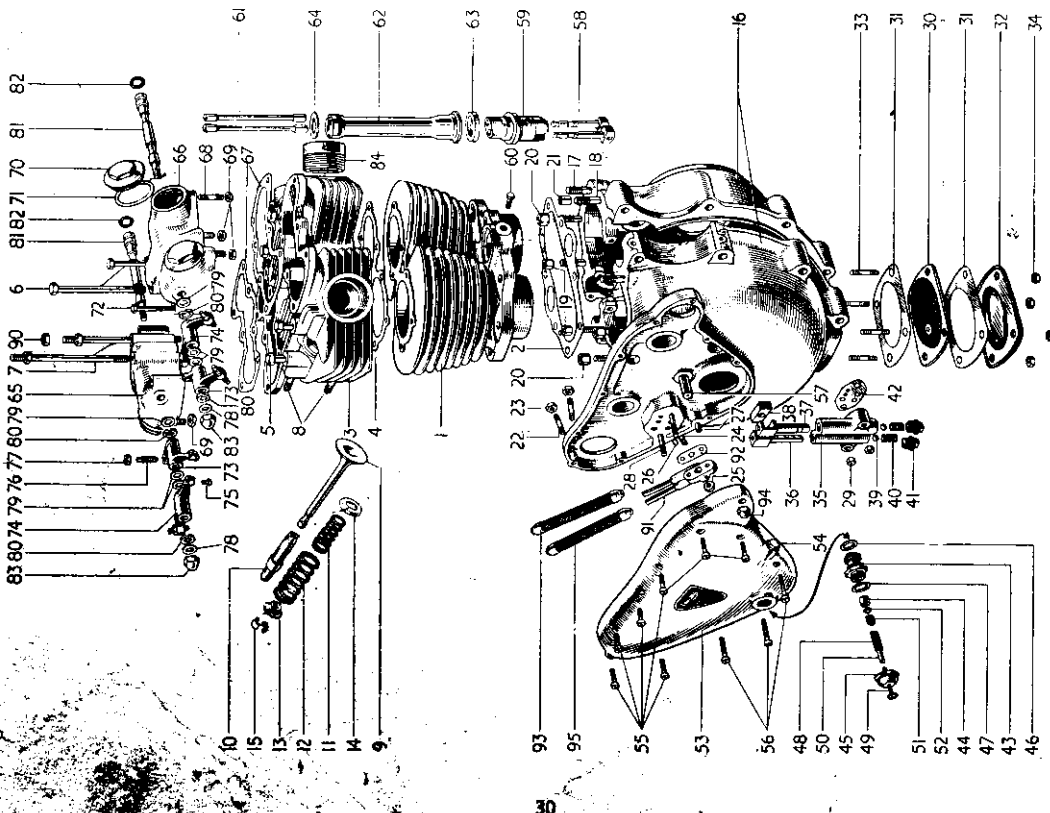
CRANKCASE, CYLINDER BLOCK, CYLINDER HEAD, etc.
